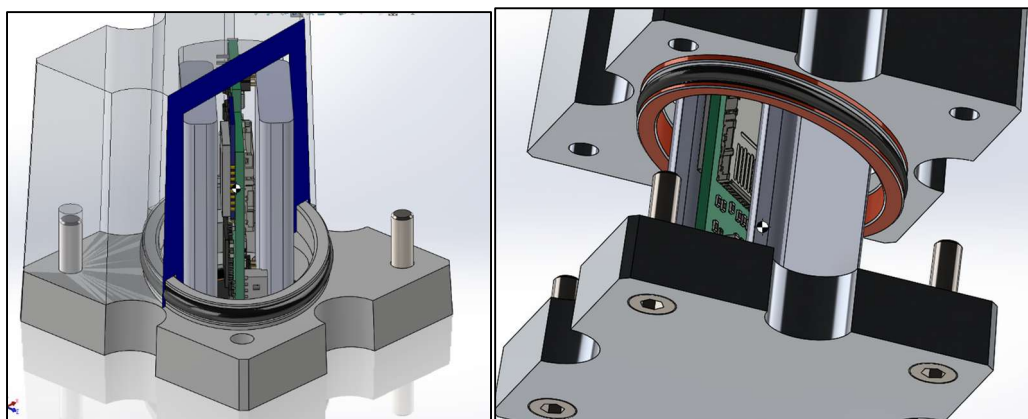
CAD drawings of the 2<sup>nd</sup> SmartAntifer prototype (May 2021).
